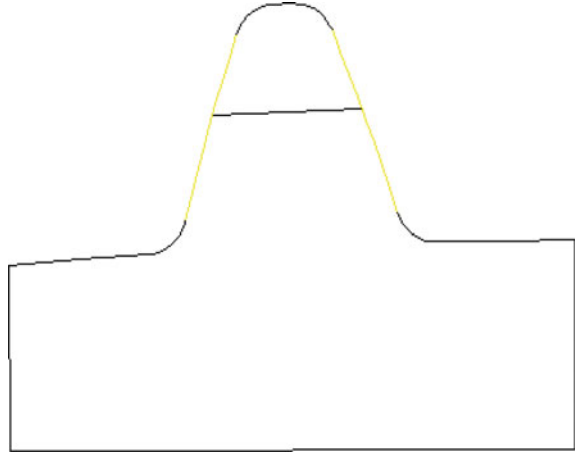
Involute profile of symmetric gear tooth with circular fillet
